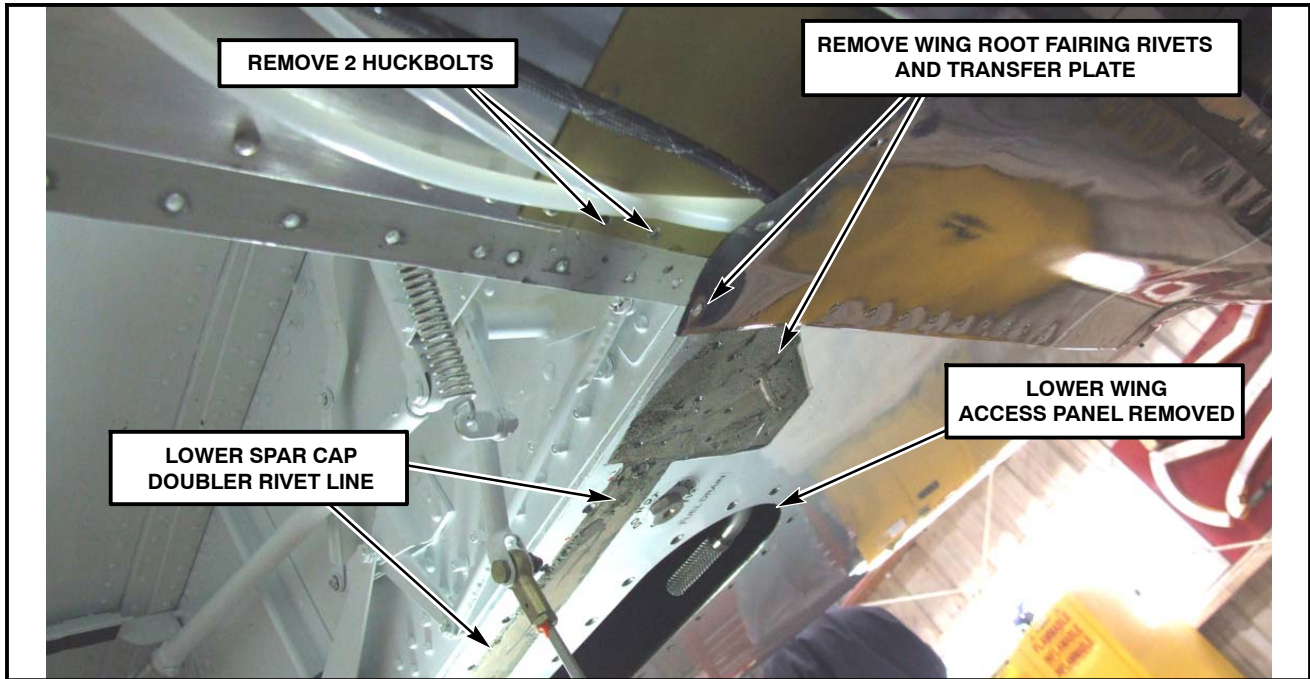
LOWER SPAR CAP RIVET LINE - BOTTOM OF WING
